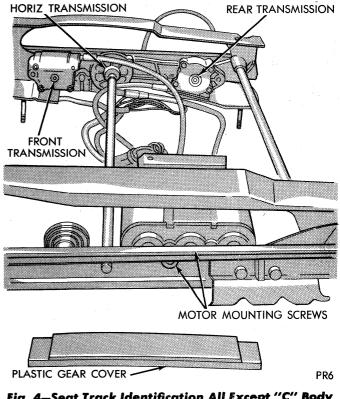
Seat Track Identification All Except "C" Body 50/50 Seat
